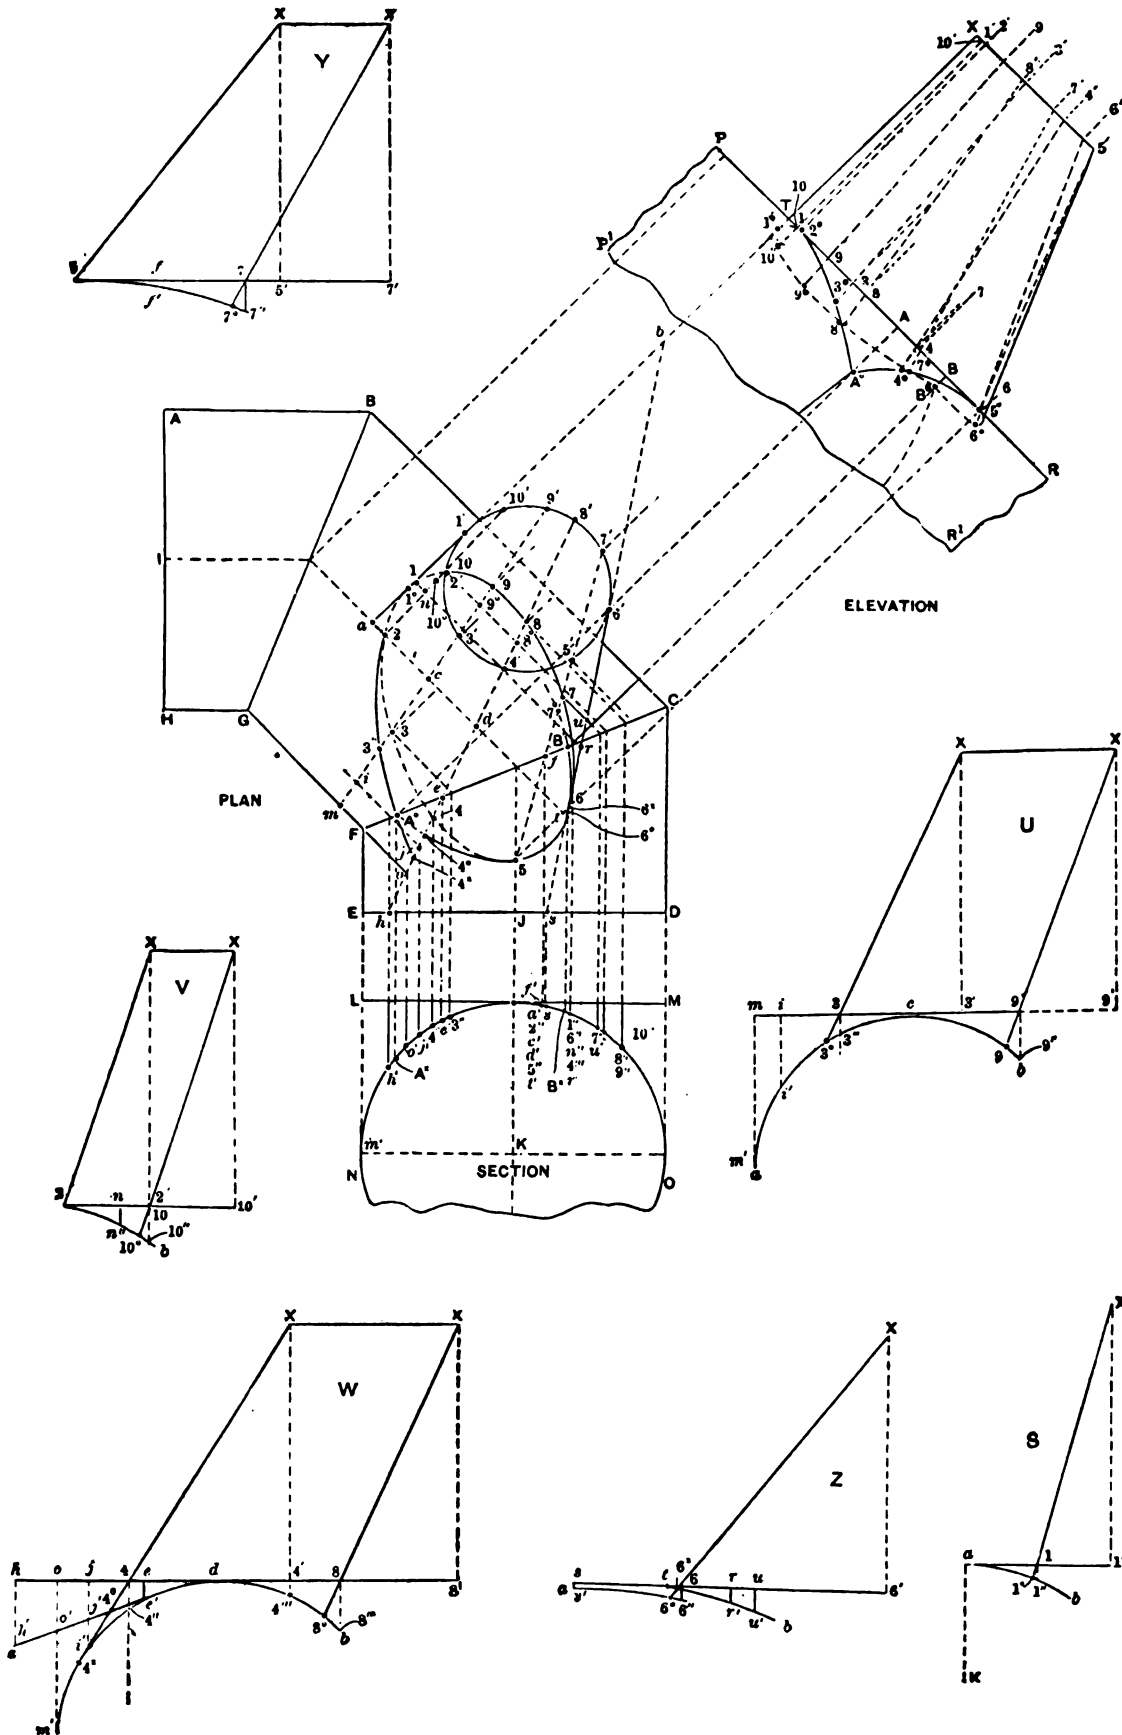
Plan, Elevation and Developed Sections of Flaring Hopper Joining a Pieced Elbow
